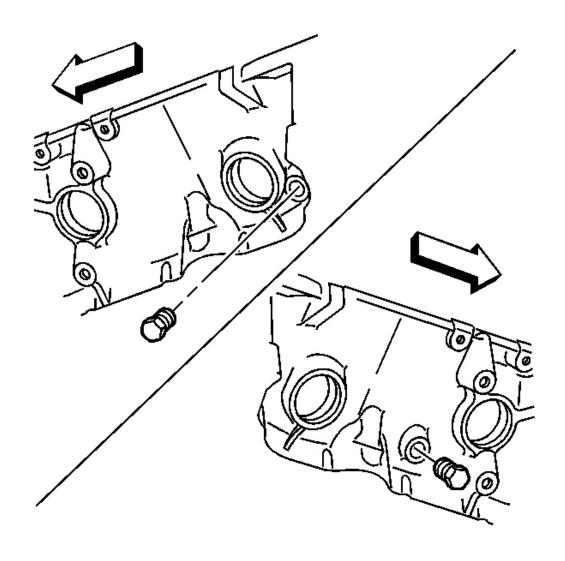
View Of Engine Block Coolant Drain Hole Plugs Courtesy of GENERAL MOTORS CORP.
